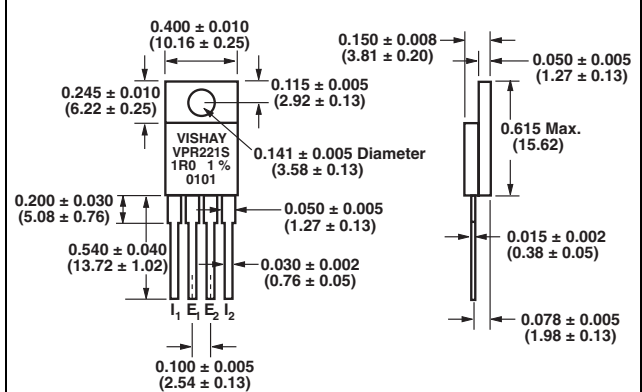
VPR220S AND VPR221S FORMING DIMENSIONS in inches (millimeters)
